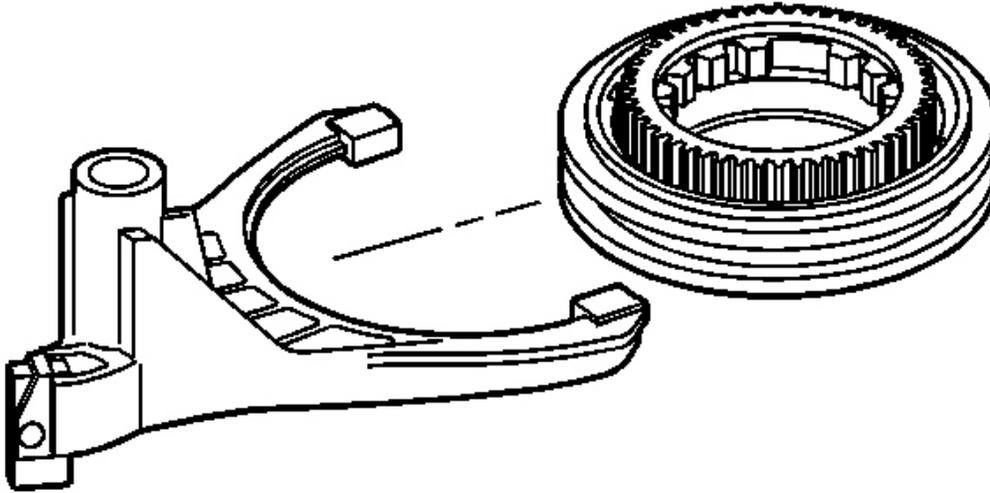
View Of Lockup Shift Assembly & Lockup Mode Shift Fork
